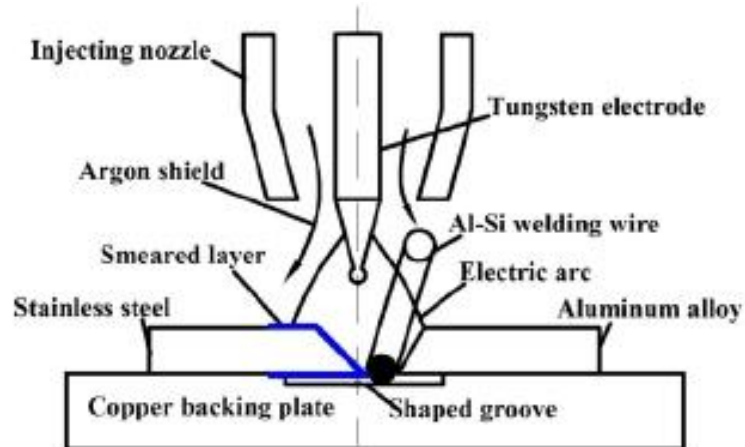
Schematic illustration of butt TIG welding–brazing.
